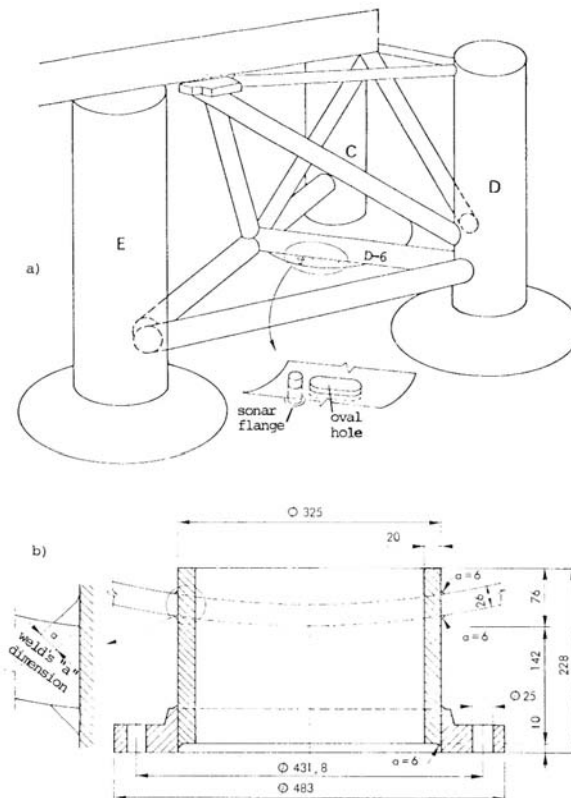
a) Detailed geometry of the D, E and C columns together with the bracings with the indication of the sonar flange; b) Position and welding joint detail for sonar flange plate
